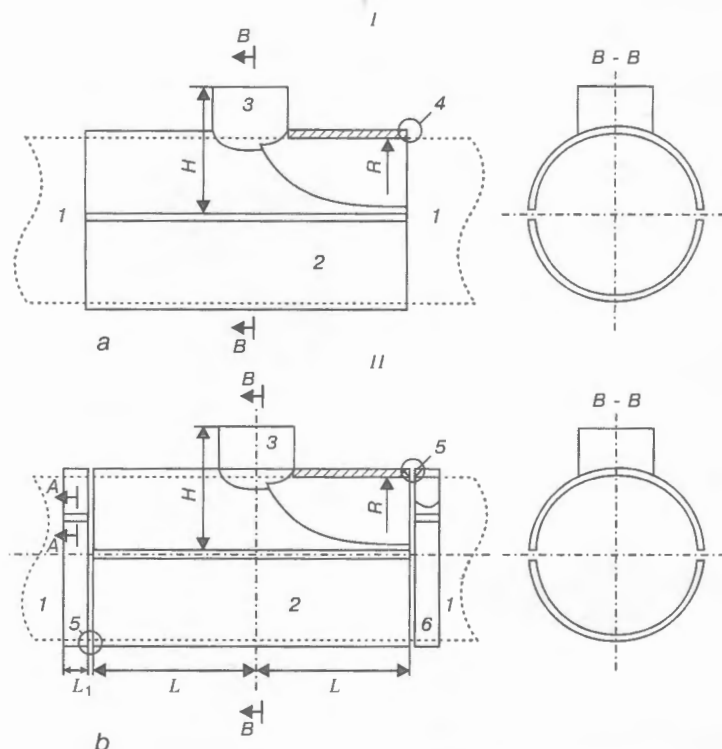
Split T-joint of type I (*a*) and II with technological rings (*b*): 1 – pipeline; 2 – sleeve (T-joint); 3 – branch pipe; 4 – fillet weld; 5 – lap-butt joint; 6 – additional part of the split sleeve
